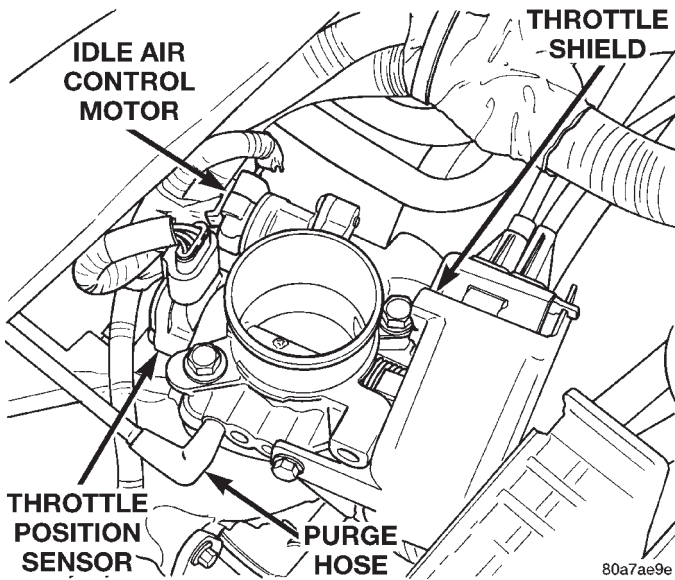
Throttle Position Sensor/Idle Air Control motor—2.0L engine
